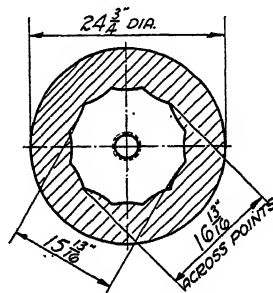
CROSS SECTIONS OF TYPE OF INGOT MOLD SHOWN IN FIG. 1.
